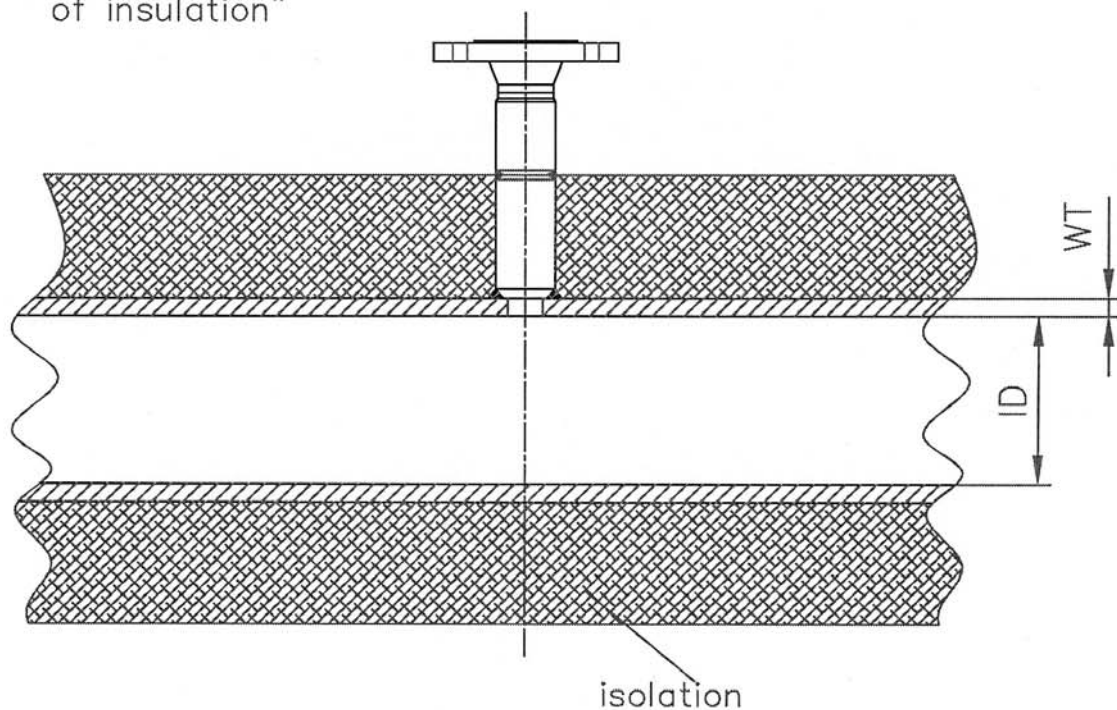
Threaded weld boss for IBR-25/26 mat. Carbon steel, 316 SS
